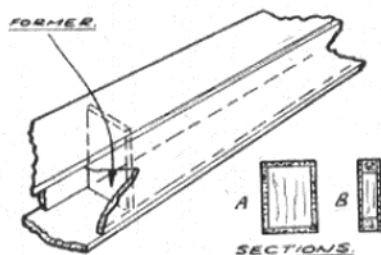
BOX FUSELAGE CONSTRUCTION.
